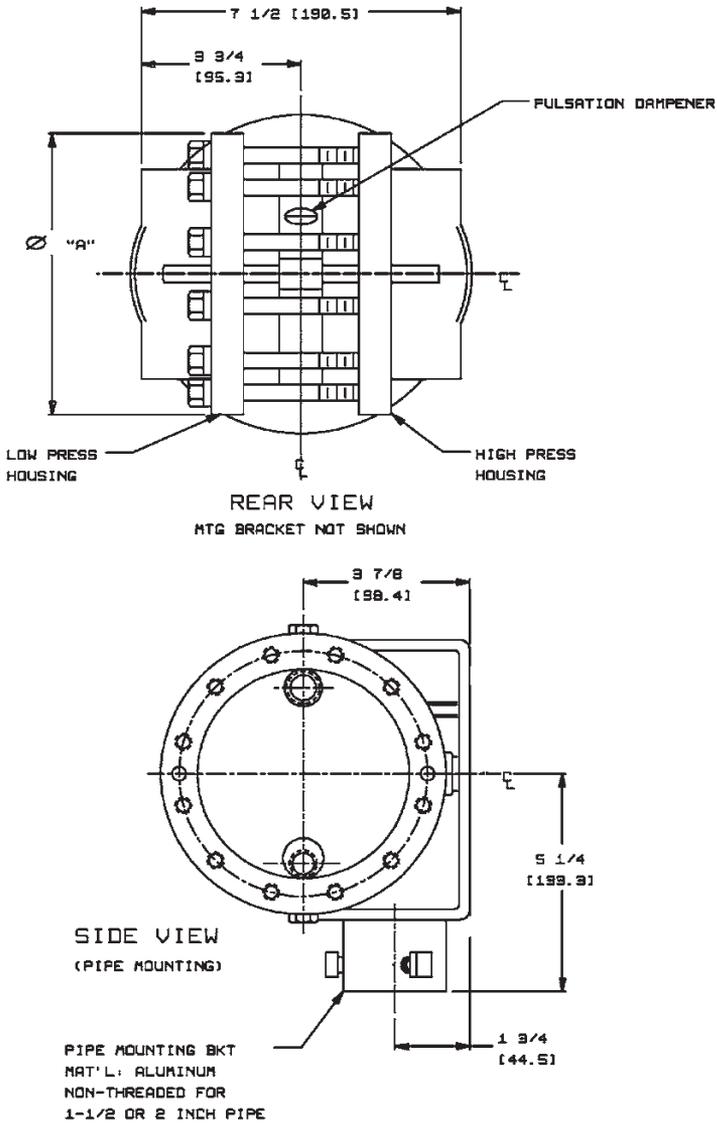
199 DPU Dimension Drawing (Part 1 of 2)
